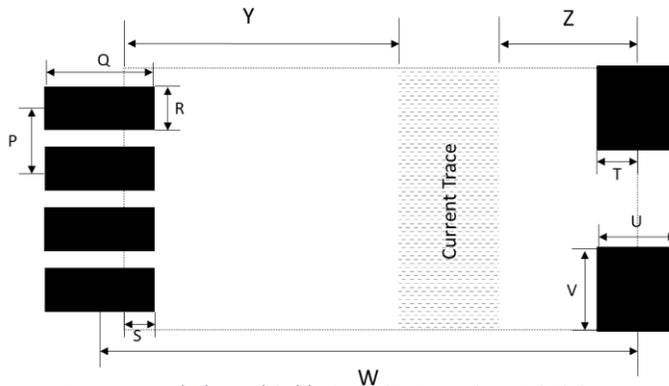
Recommended Hand Soldering PCB Footprint – DS50.2m
